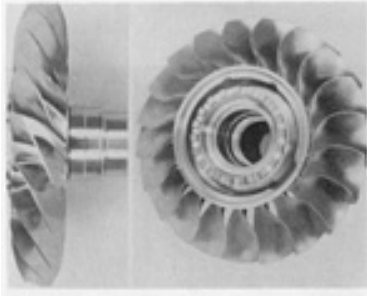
Front-stage helicopter engine compressor rotor blisk
